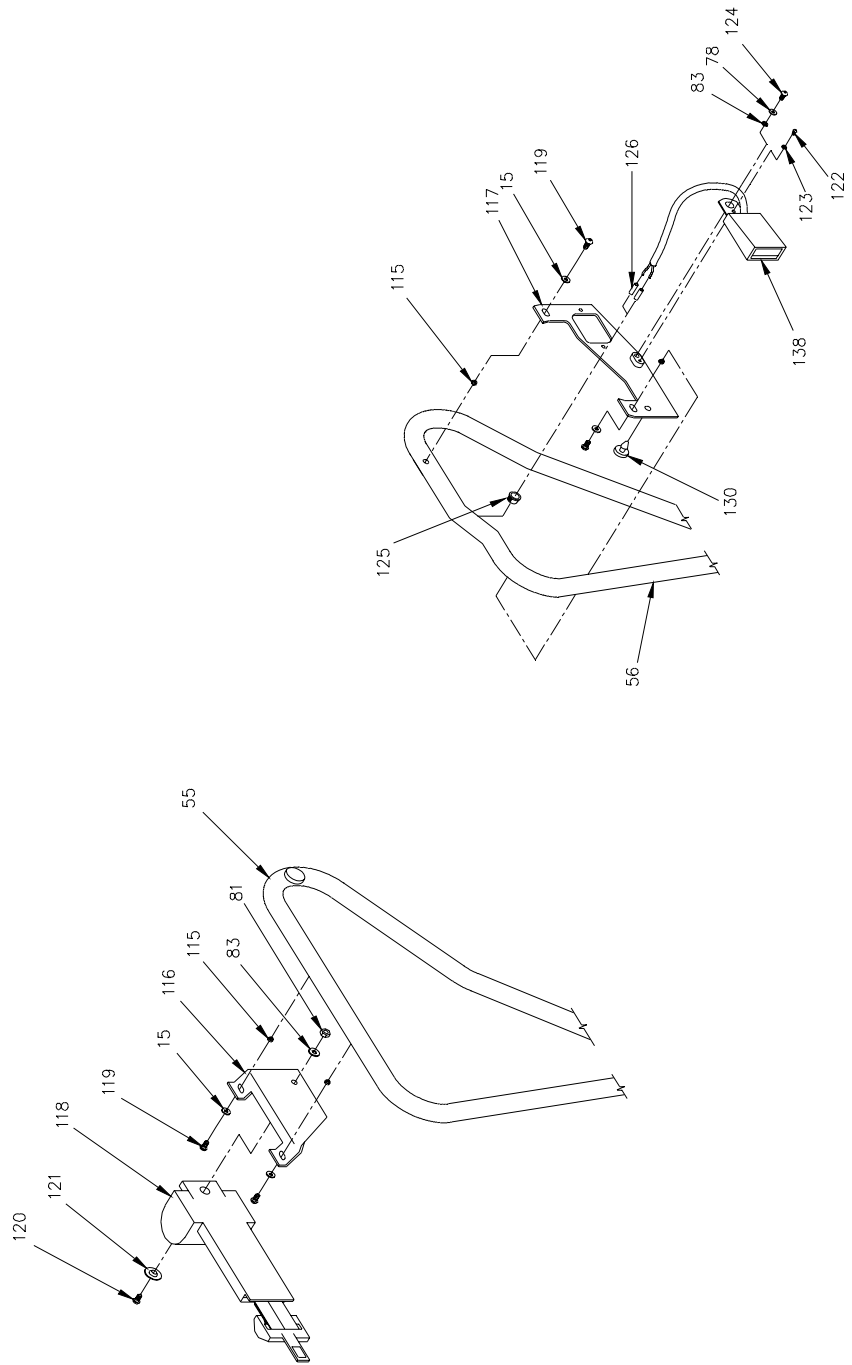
B]: RESTRAINT BELT DETAIL ASSEMBLY
